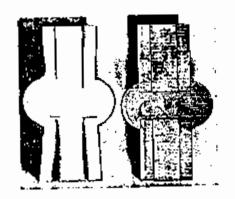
CONSEQUENCES OF IMPROPER ALUMINUM JOINT DESIGN (left), ALUMINUM JOINT PROPERLY PROTECTED (Right).
